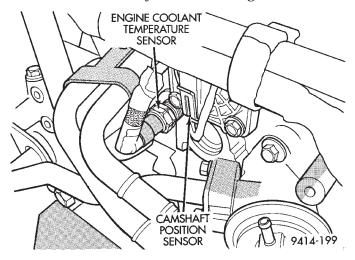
Engine Coolant Temperature Sensor—2.0L Engine
